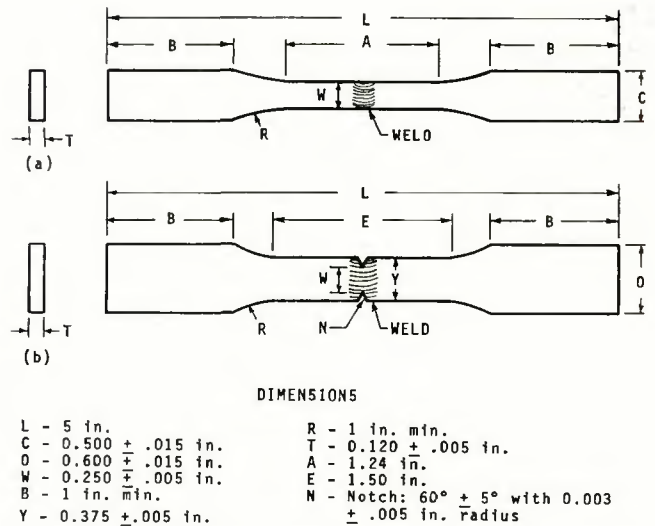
Flat tensile specimens (a) unnotched and (b) notched at the weld
